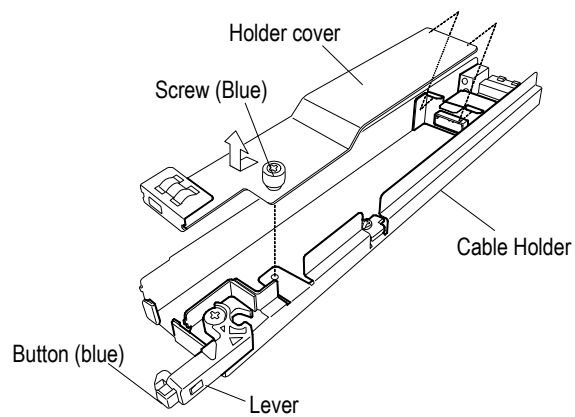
Removing the Cable Holder and the Holder Cover
